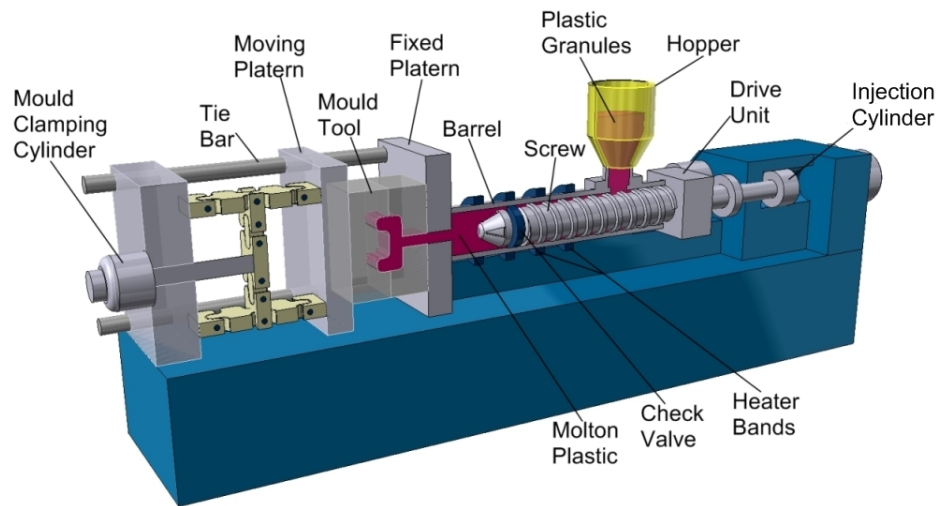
Schematic of injection moulder. Taken from rutlandplastics.co.uk.
